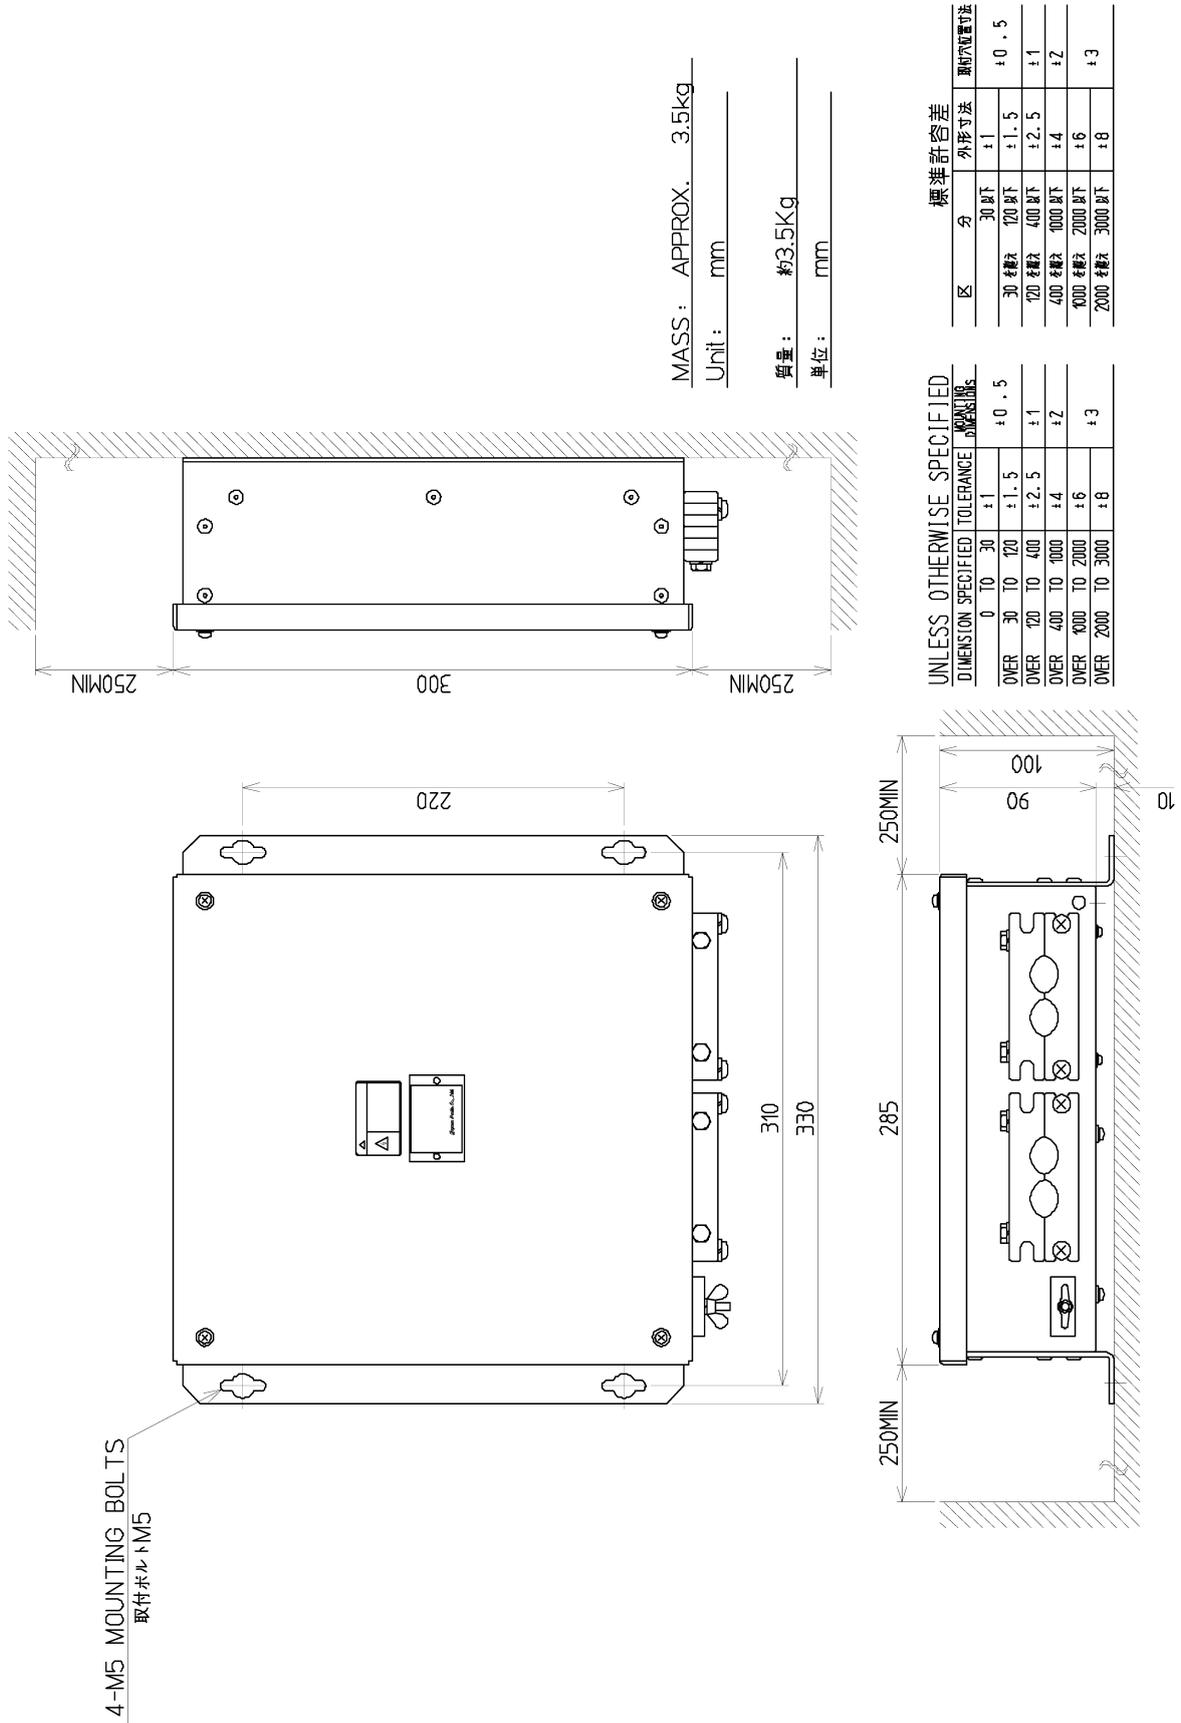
Exterior Drawing of Connecting Unit, Type NQE-3151
